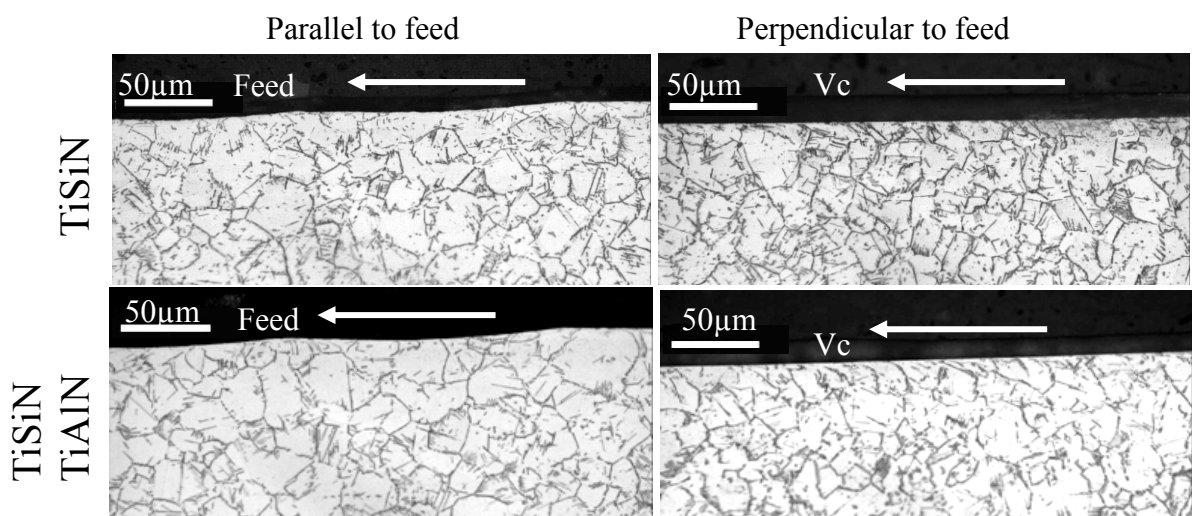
Cross-sectional optical micrographs of machined workpiece sub-surface produced with new TiSiN and TiSiN/TiAlN coated tool at cutting speed of 300m/min
